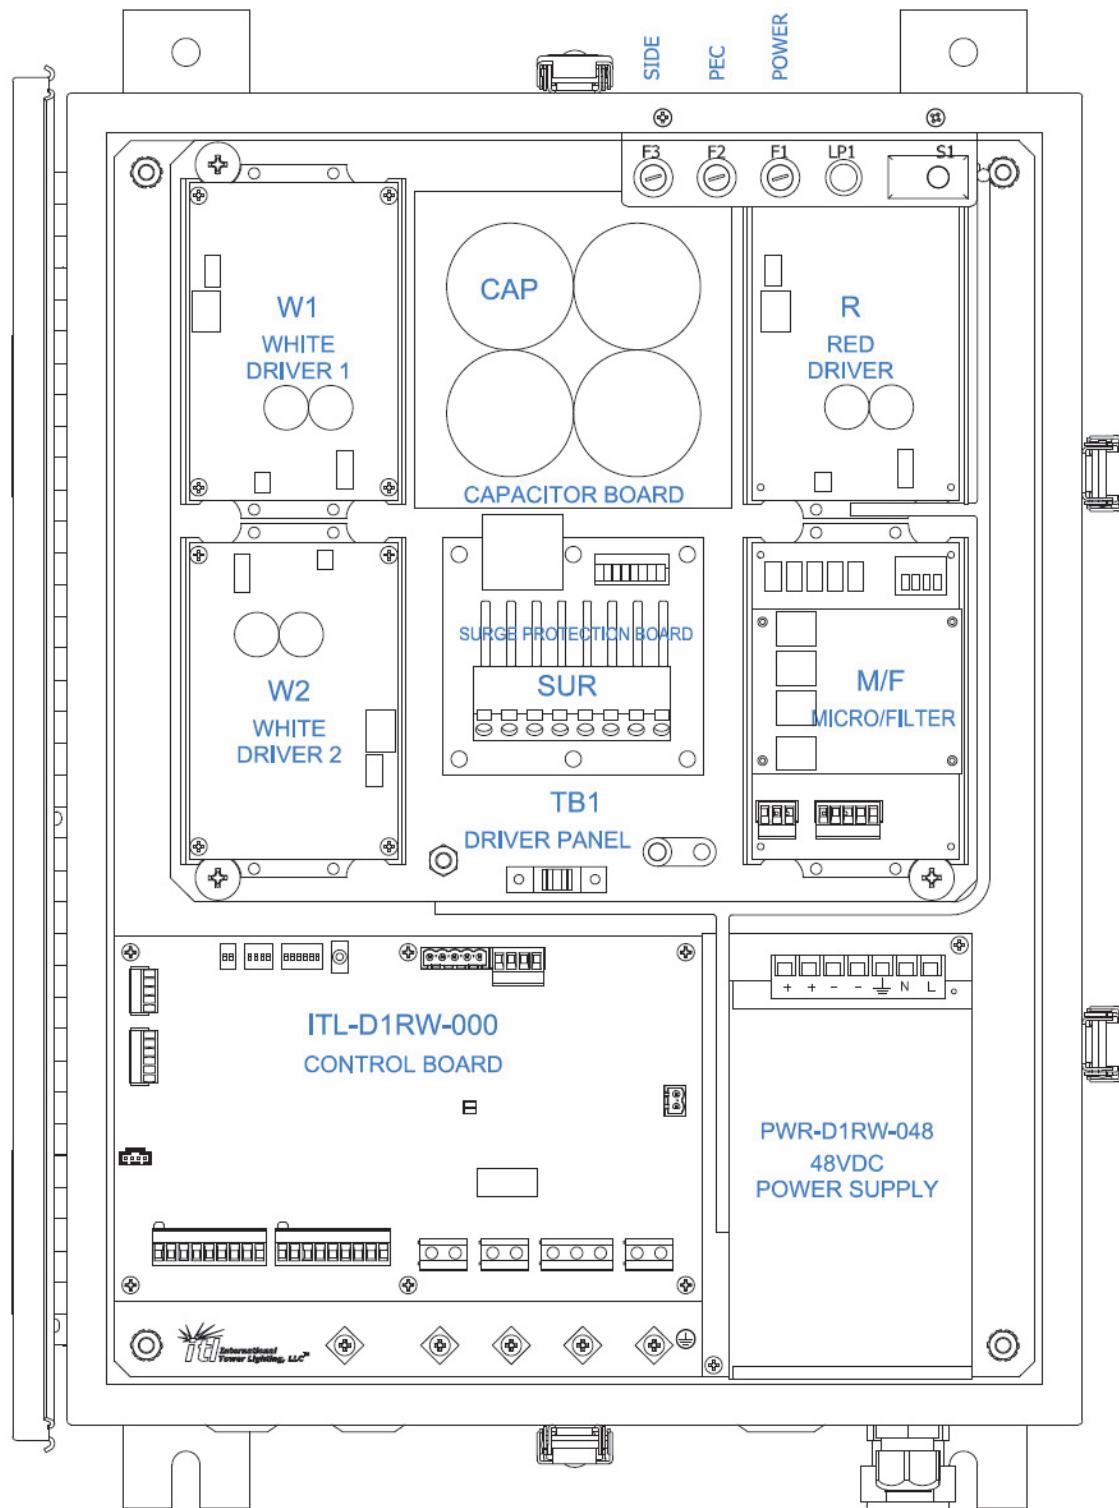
IPS-D1RW Power Supply Panel Component Locator
